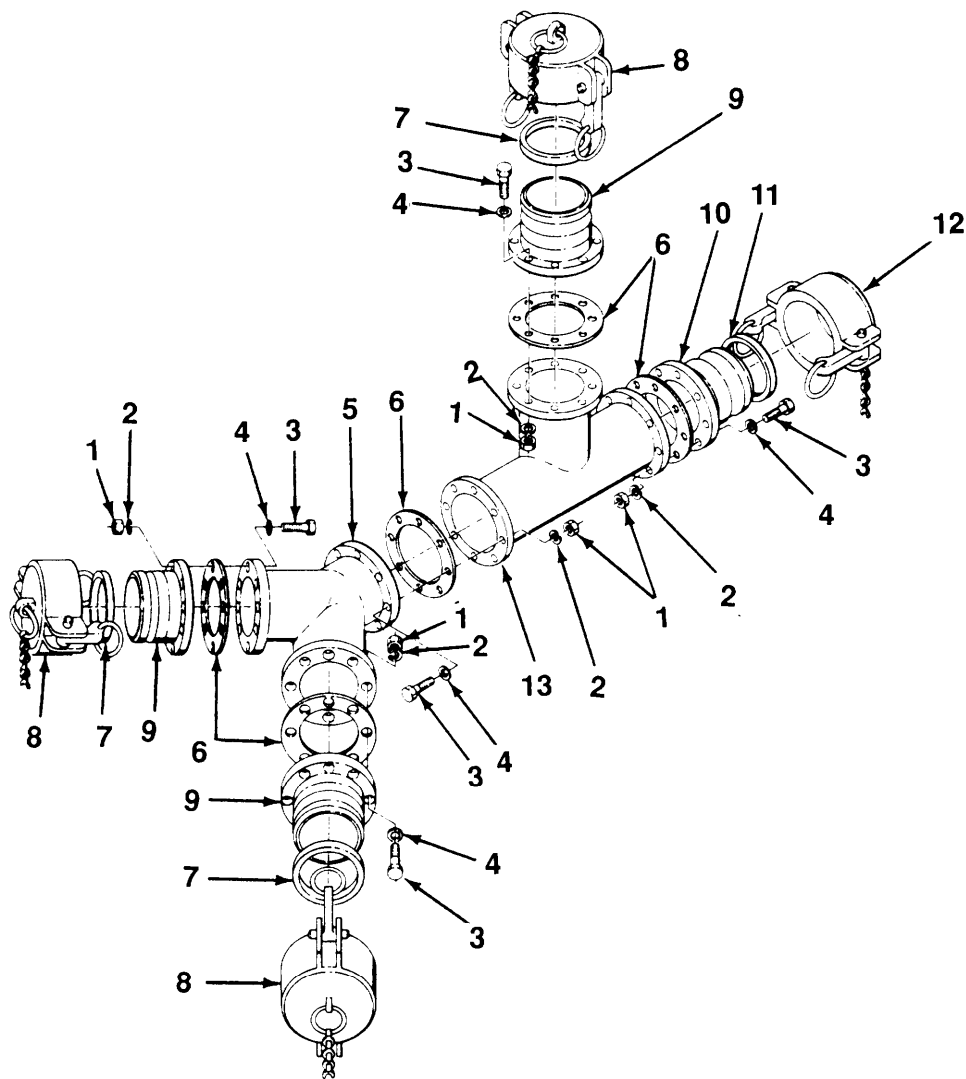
Wye and Tee Assembly, 3 In. X 4 In.
